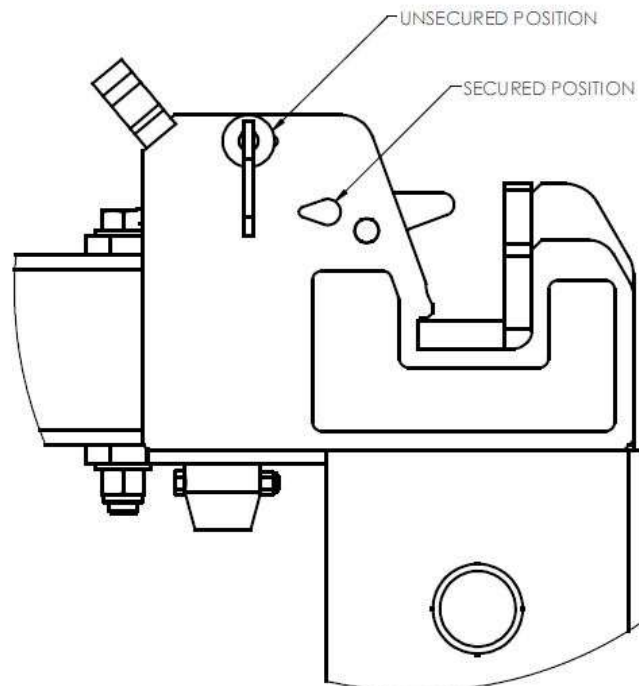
Disassembly Step Six – Disengaging Coupler Latch
